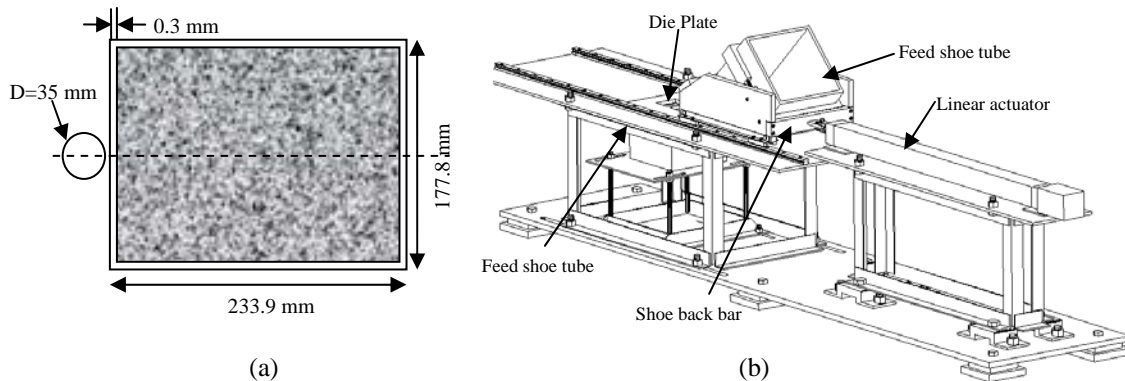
(a) Dimensions of square feed shoe cross section with circular die (drawn to scale), (b) An AutoCAD drawing of the assembled PDT-II
